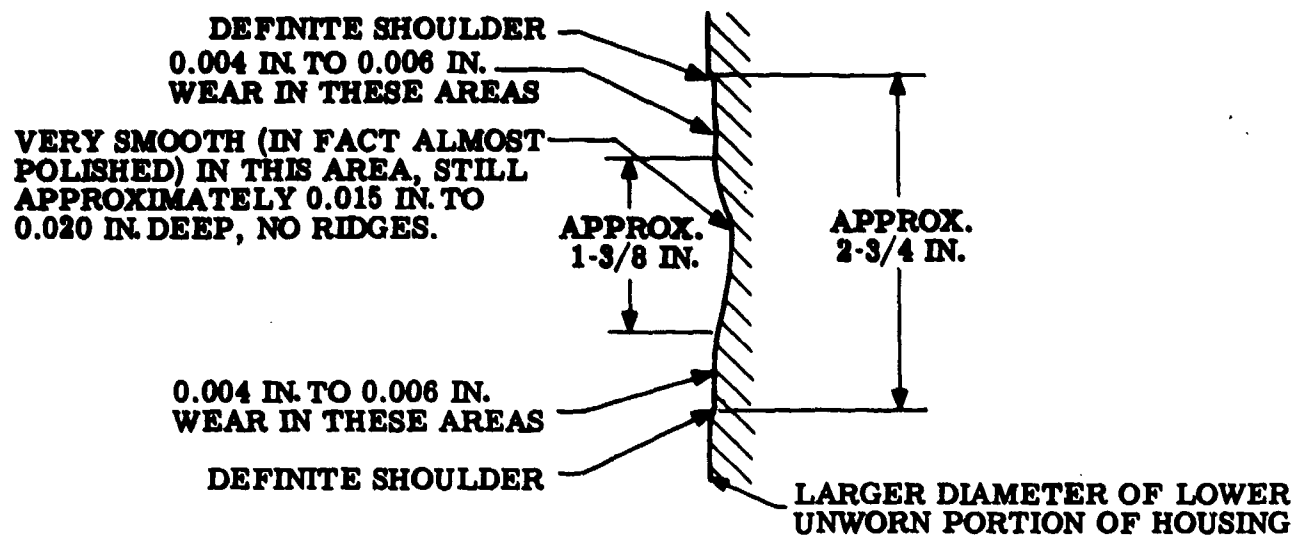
SURFACE PROFILE OF LOWER PLANETARY GEAR HOUSING
